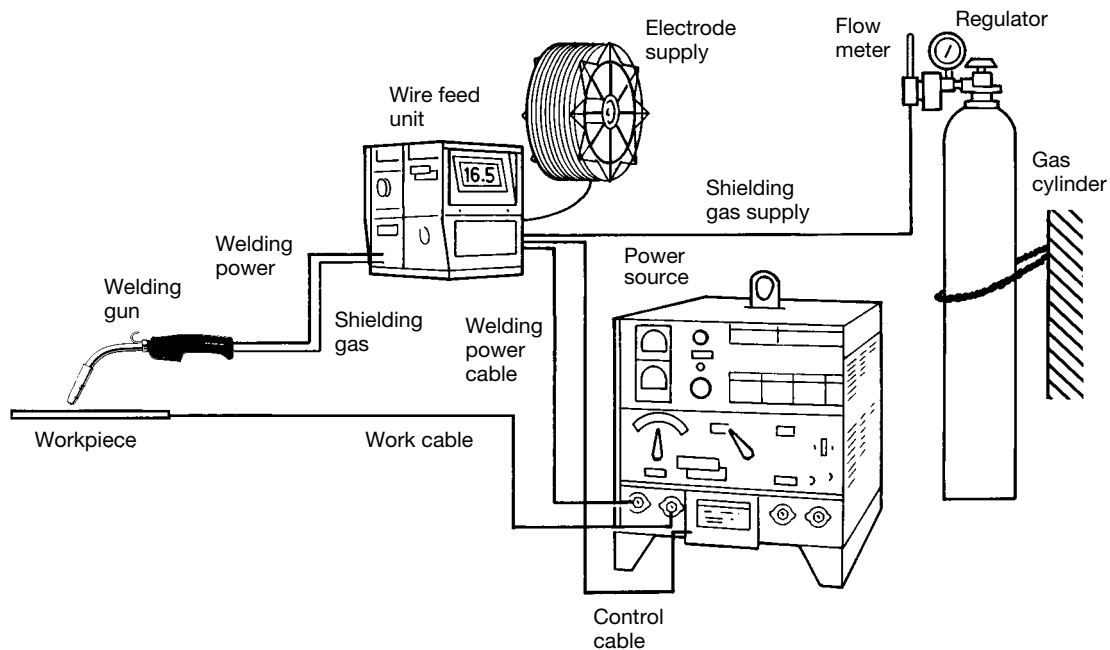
Semiautomatic gas metal arc welding installation.
